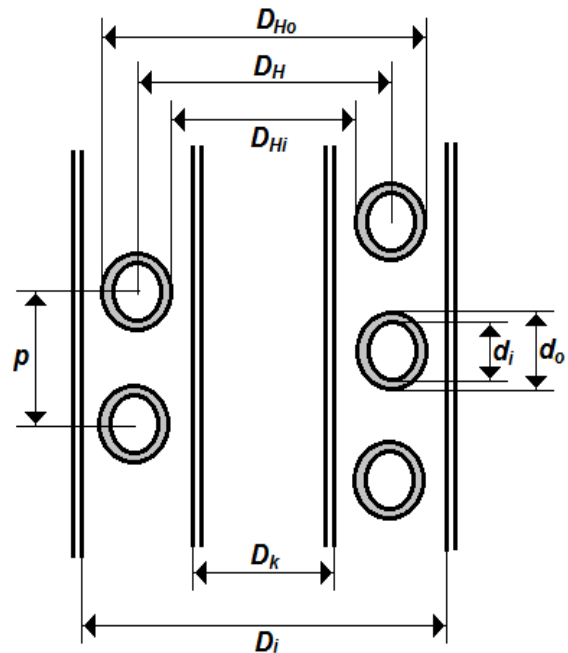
Geometric parameters of the helical coil heat exchanger.
